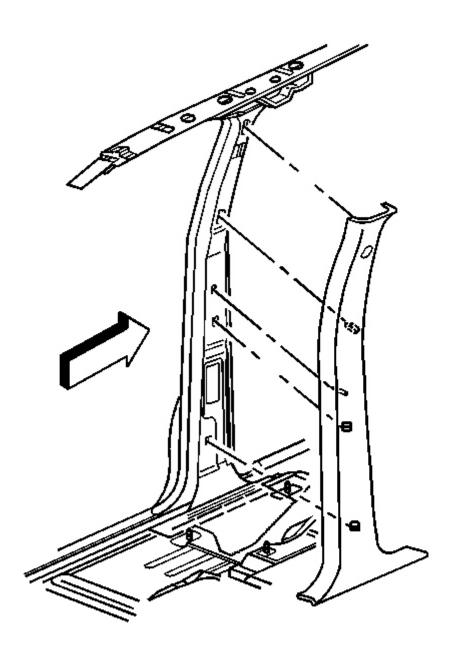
Removing/Installing Garnish Molding (Center Pillar) Courtesy of GENERAL MOTORS CORP.
